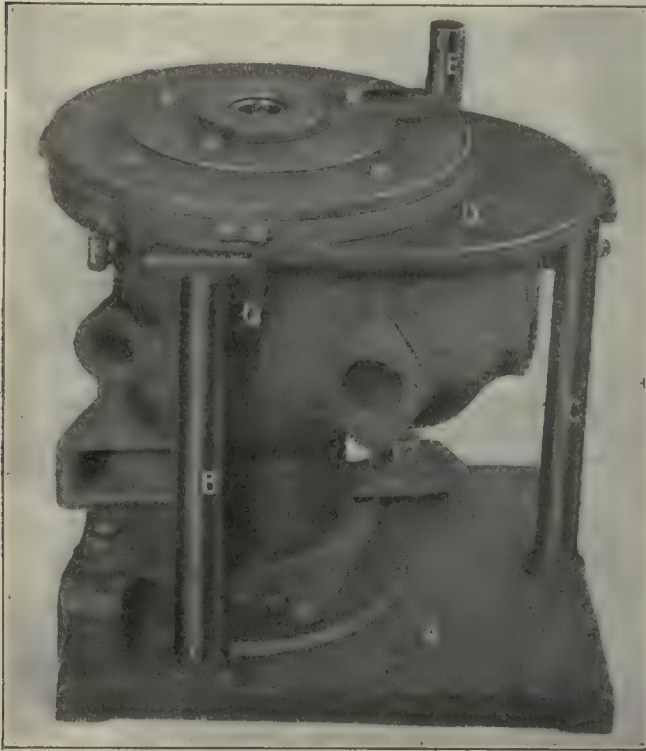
FIXTURE FOR DRILLING HOLE IN TOP
